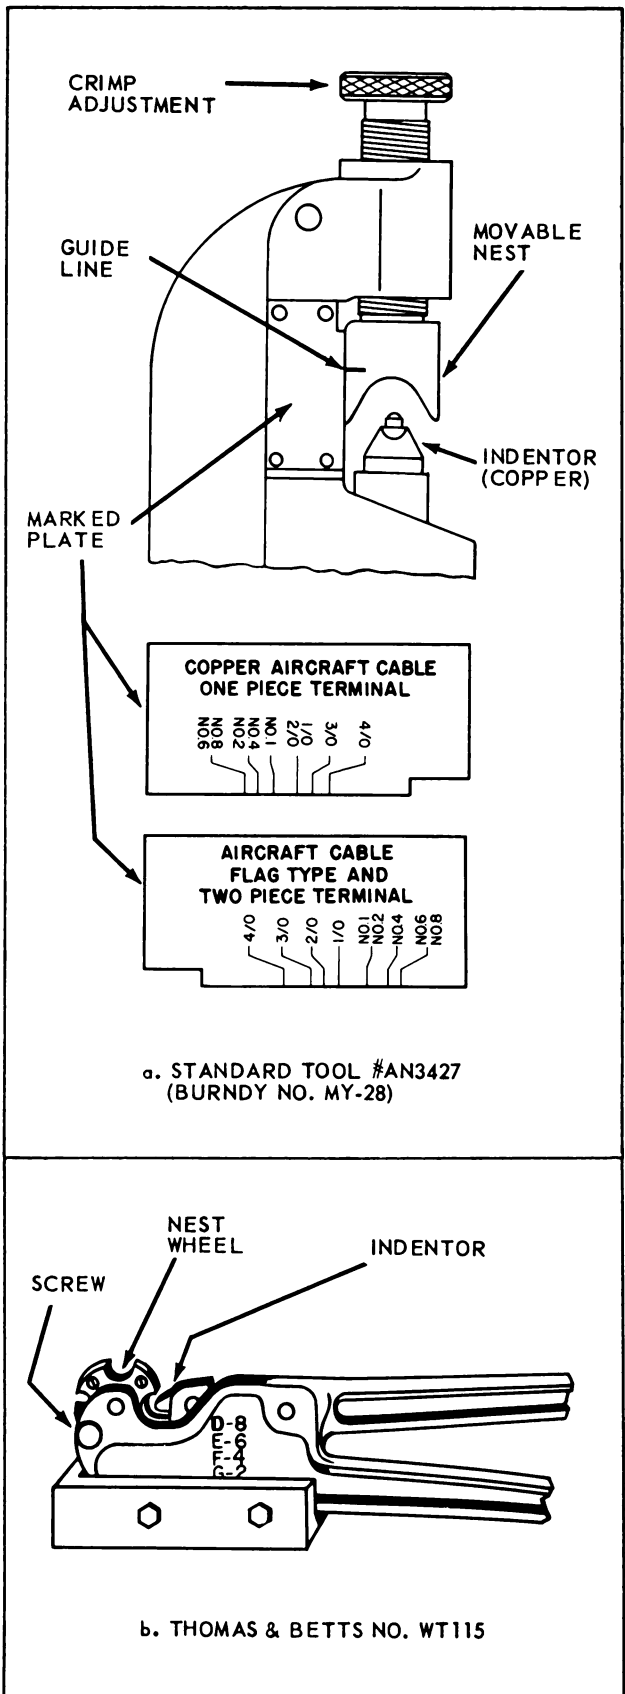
Tools - Hand Crimping Large Copper Terminal Lugs
